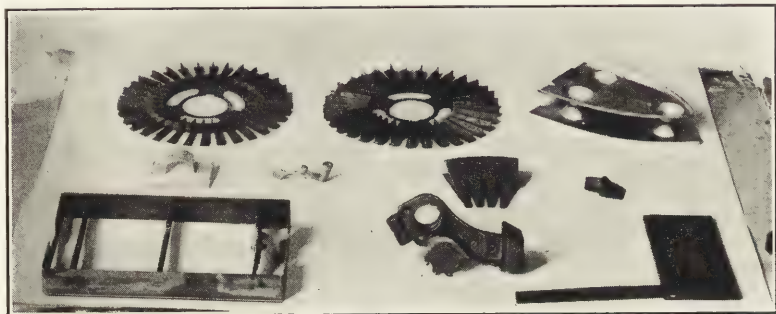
A Variety of Articles made on a Spot Welding Machine.
